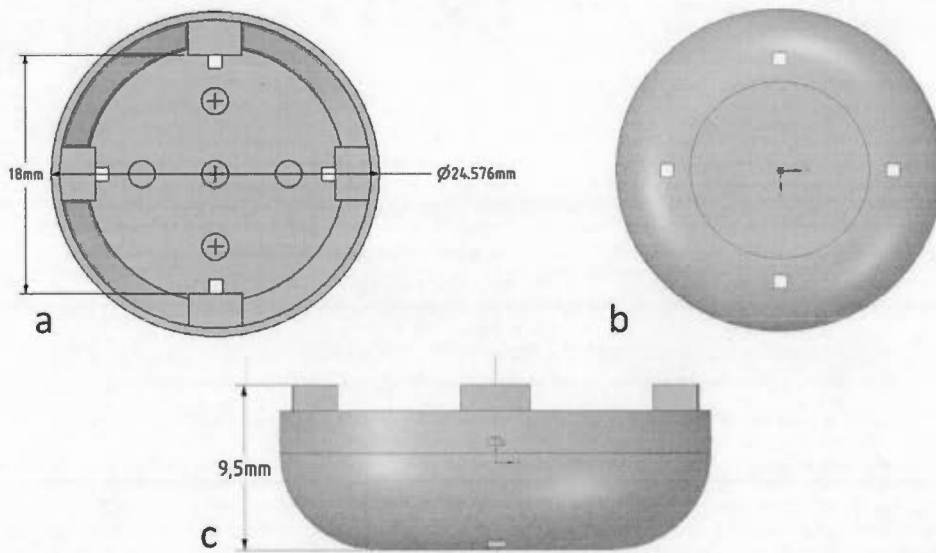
PAS fifth (5-2) concept design bottom part. (a) Top view. (b) Bottom view. (c) Side view
